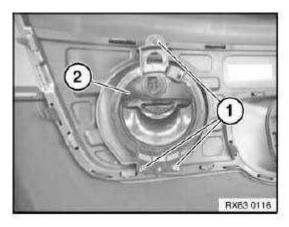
Identifying Screws And Position Light Courtesy of BMW OF NORTH AMERICA, INC.
